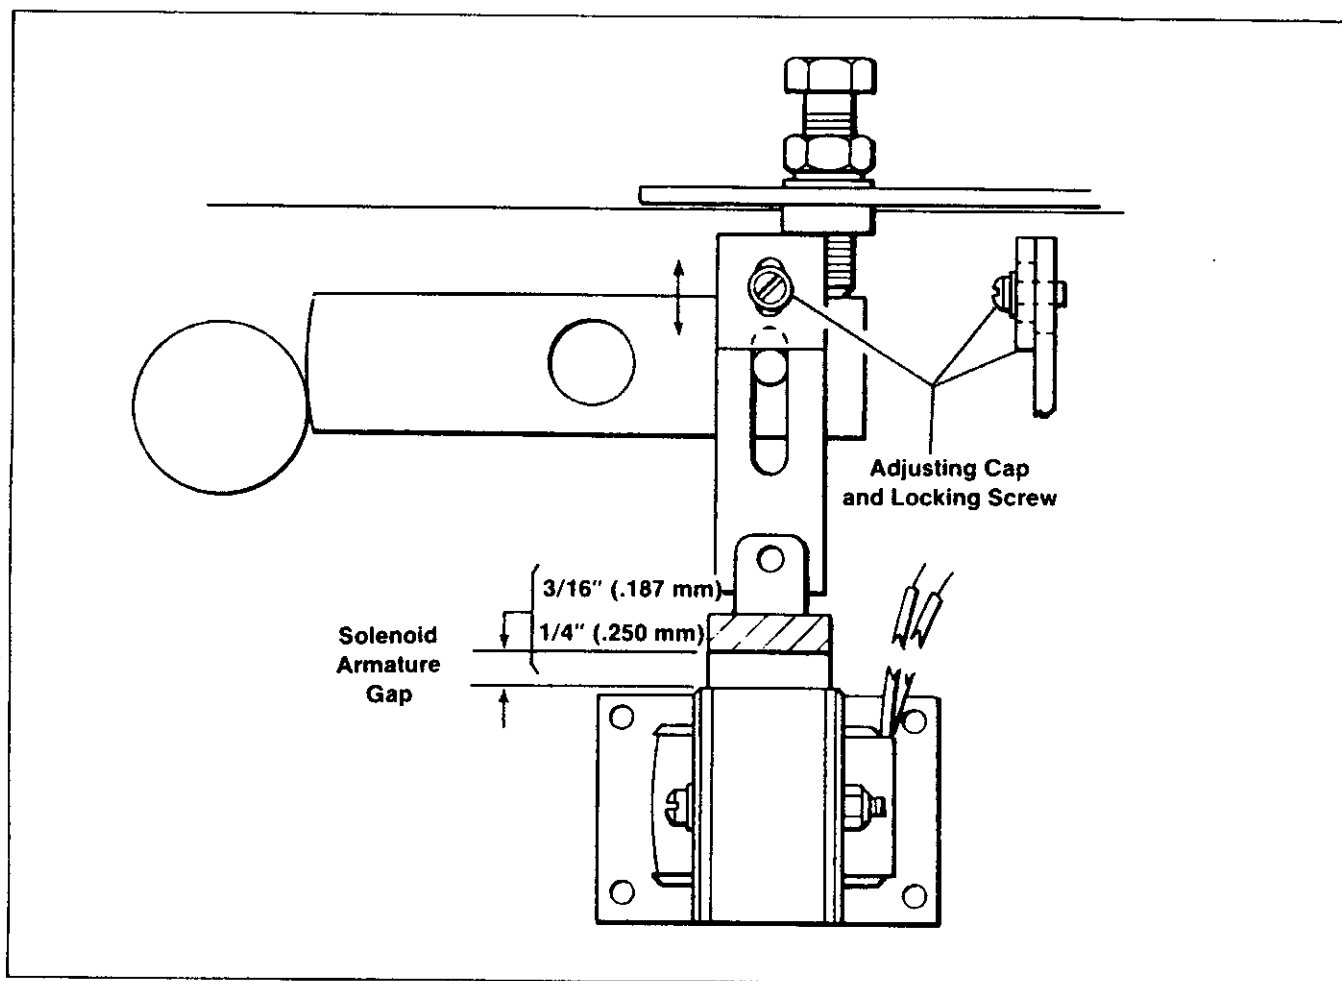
A. Spring Release Solenoid Armature Cap Adjustment
